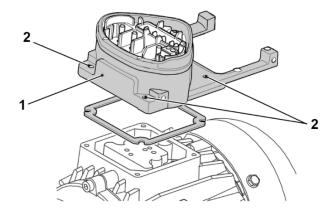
Assembly sequence: Connection box – adapter plate (sizes A - C)
